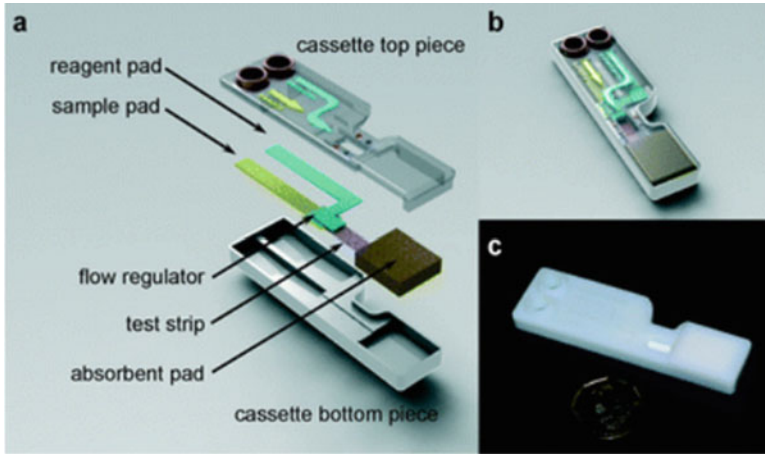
Device for the stacking lateral flow immunoassay; (a) The exploded view of the device. The test assembly consists of a sample pad, a reagent pad, a flow regulator, a test strip and an absorbent pad. The test assembly is housed in the cassette; (b) The assembled stacking flow device; (c) Photograph of the stacking flow device prototyped with a 3D printer (Reproduced from Yi et al. [74] with permission from the Royal Society of Chemistry)
